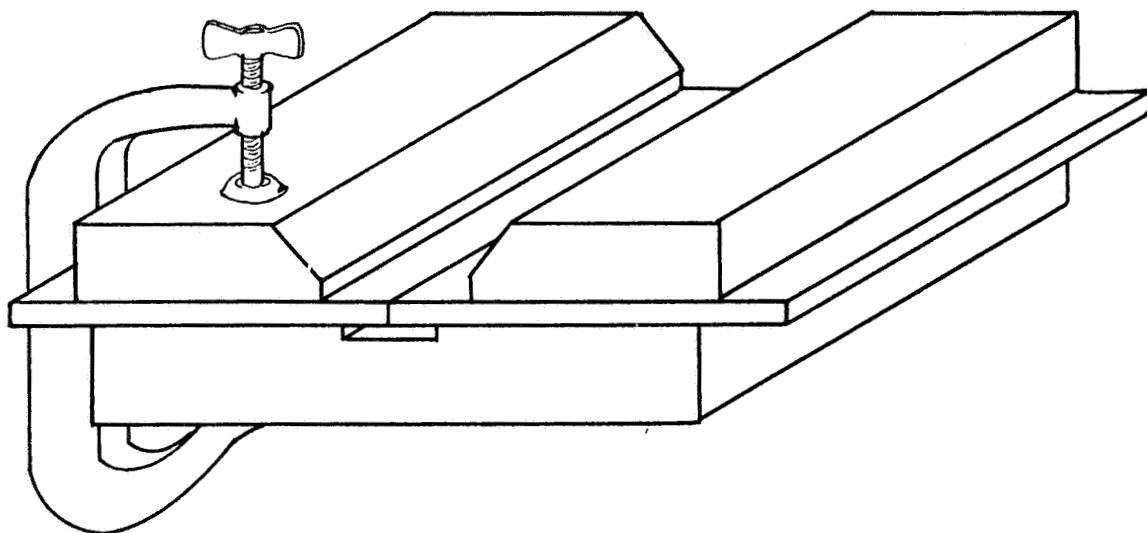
SIMPLE JIGGING FOR BUTT WELDS
